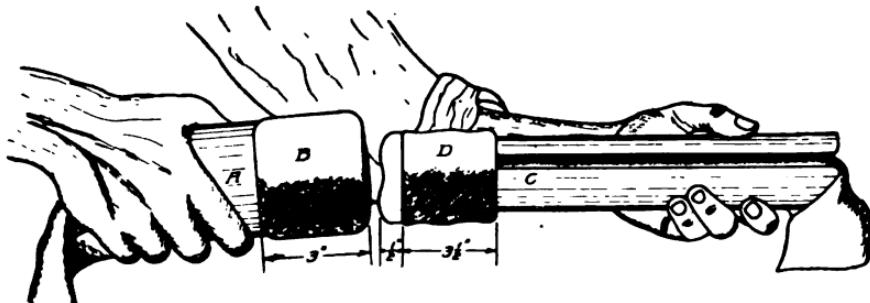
Sketch Showing Method of Inserting New Section in Inside Tube
